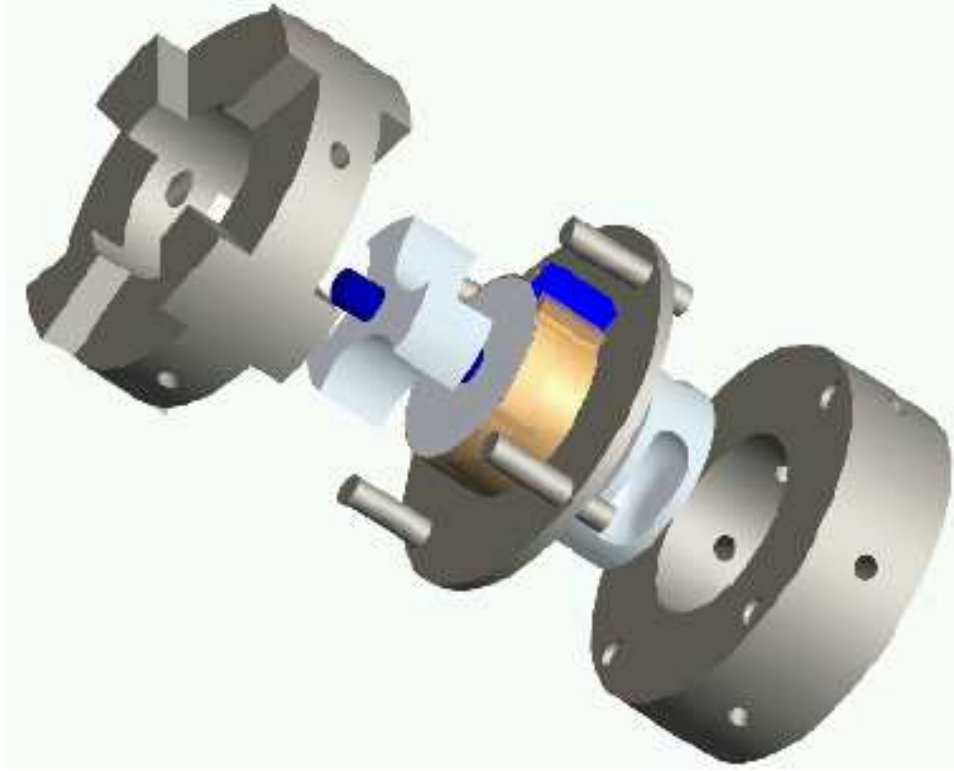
The TBV exploded, with its three sections. The drive section, with its fluid jet stator and three bladed rotor appears at the top. The brake section is in the center, with its rotor surrounded by a band brake. The control section appears at the bottom, with its stator and three bucket rotor.
